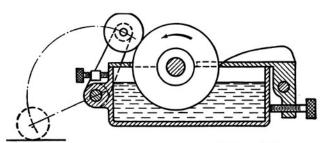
In the indirect types of film applicator, a transfer wheel receives glue from the main wheel and transfers it to the point of application. The clearance between the transfer wheel and the main wheel is usually made adjustable. On machines that must be stopped frequently, the drive to the glue wheels should be independent of the drive for the main machine so that the glue wheels can be kept revolving when the machine is stopped, thus preventing the glue from drying on the surface of the wheels.
